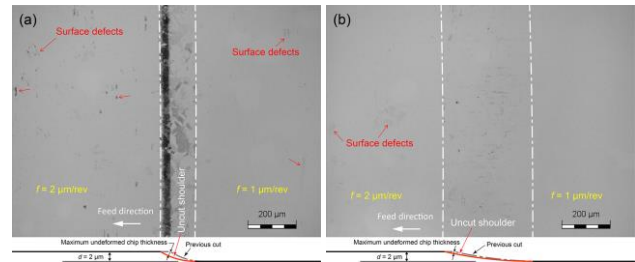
CLSM images of turned surface under (a) R1 tool, and (b) R10 tool.
